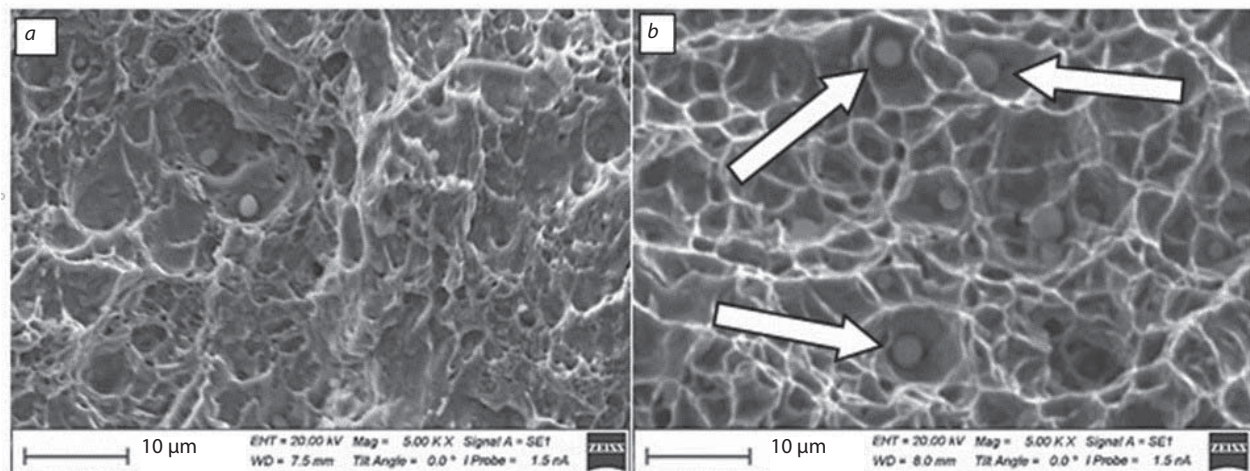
Viscous fracture facets of metal of welds No. 1 (a) and No. 2 (b). Arrows indicate the second phase particles (b)
